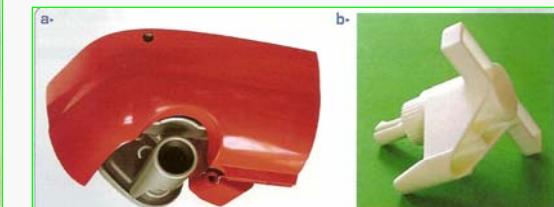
| Laser sintering and cars. a, Close-up of the laser-sintered prototype bumper section for the Jaguar XJ. The painted model was used to visualize the fit and finish of key components before production. b, The laser-sintered plastic tool that assists operators working on the new Jaguar XK production line to position window lift mechanisms during assembly.
